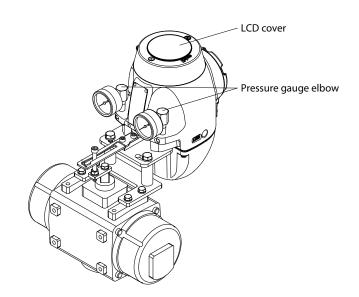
Example of LCD cover and pressure gauge elbow mounting
